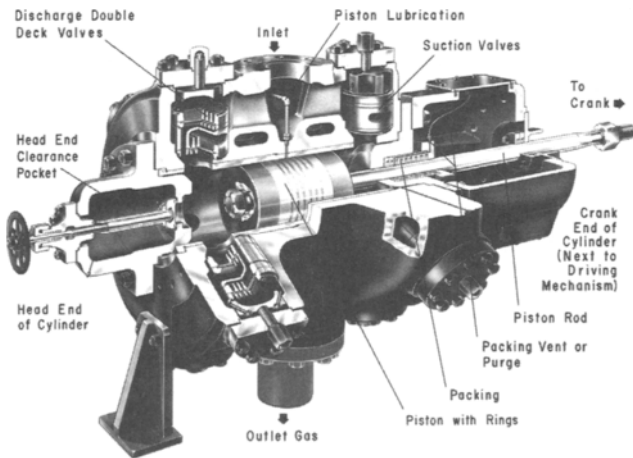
B. Cut-a-way view of typical high-pressure gas cylinder showing double-deck feather valves in place. (Used by permission: Dresser-Rand Company.)
